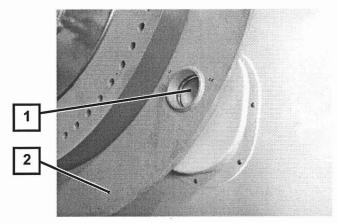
Rotor lock on rotor shaft (WTs of turbine class K08)
